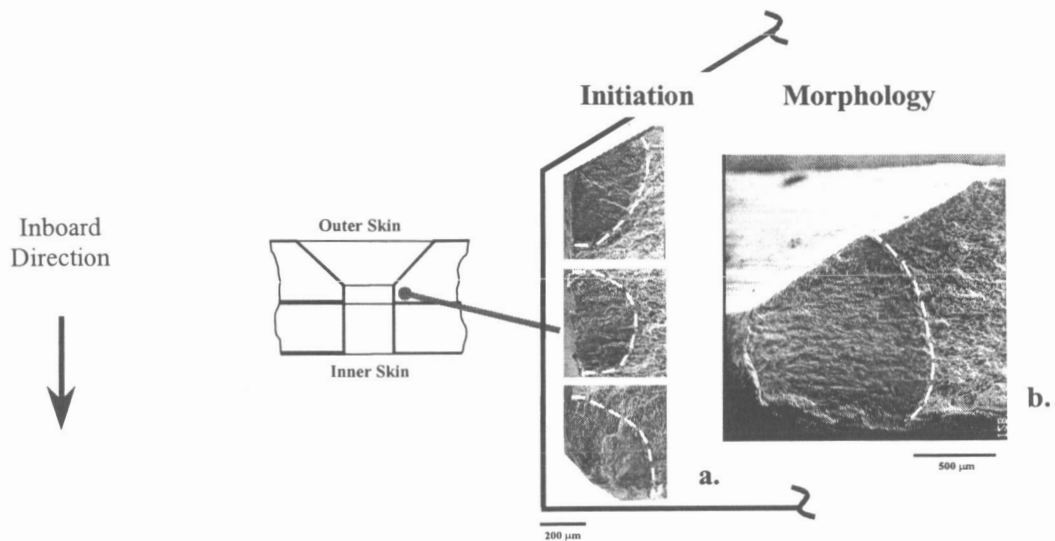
100° countersink rivet outer skin fatigue cracking: a) Depicted is the outline of the rivet hole and the micrographs show the typical crack initiation sites along the rivet hole surface and crack morphology (dashed lines mark the crack front) and b) shows the typical crack front shape of a fatigue crack that has propagated nearly one-half the length of the counter sink.
